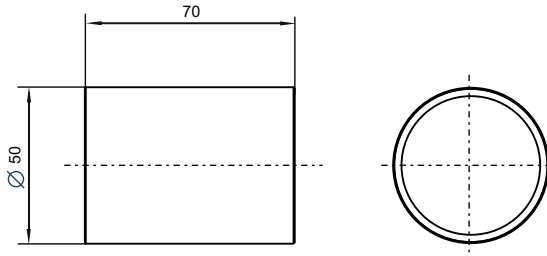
Dimension drawing: Protective lens cover \varnothing 50 mm
